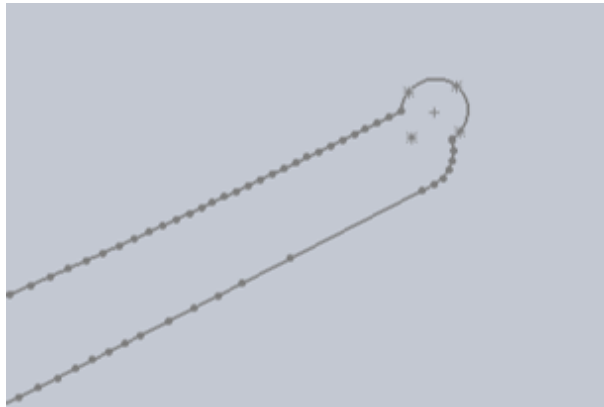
Trial 1 modified rear wing close up cross section of airfoil with added fillet, circular addition, and rounded edges of side supports.
